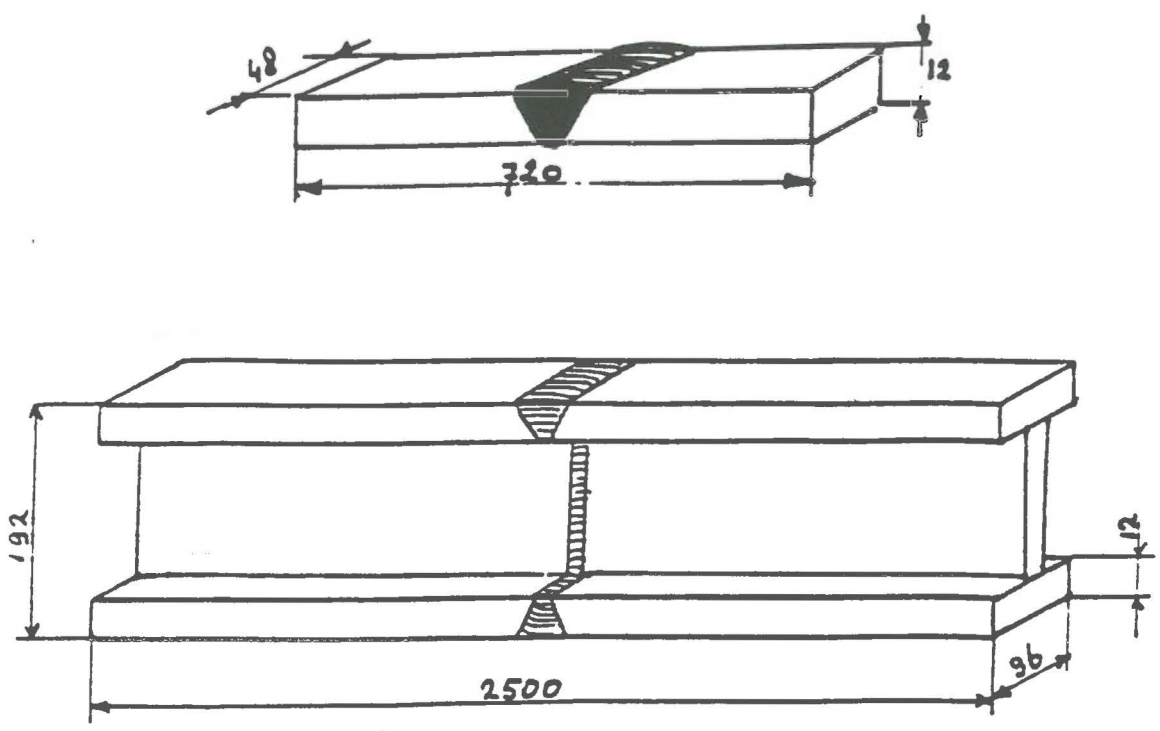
Butt welded joint (detail 1) strip as well as beam specimen. Material thickness  $t = 12$  mm
